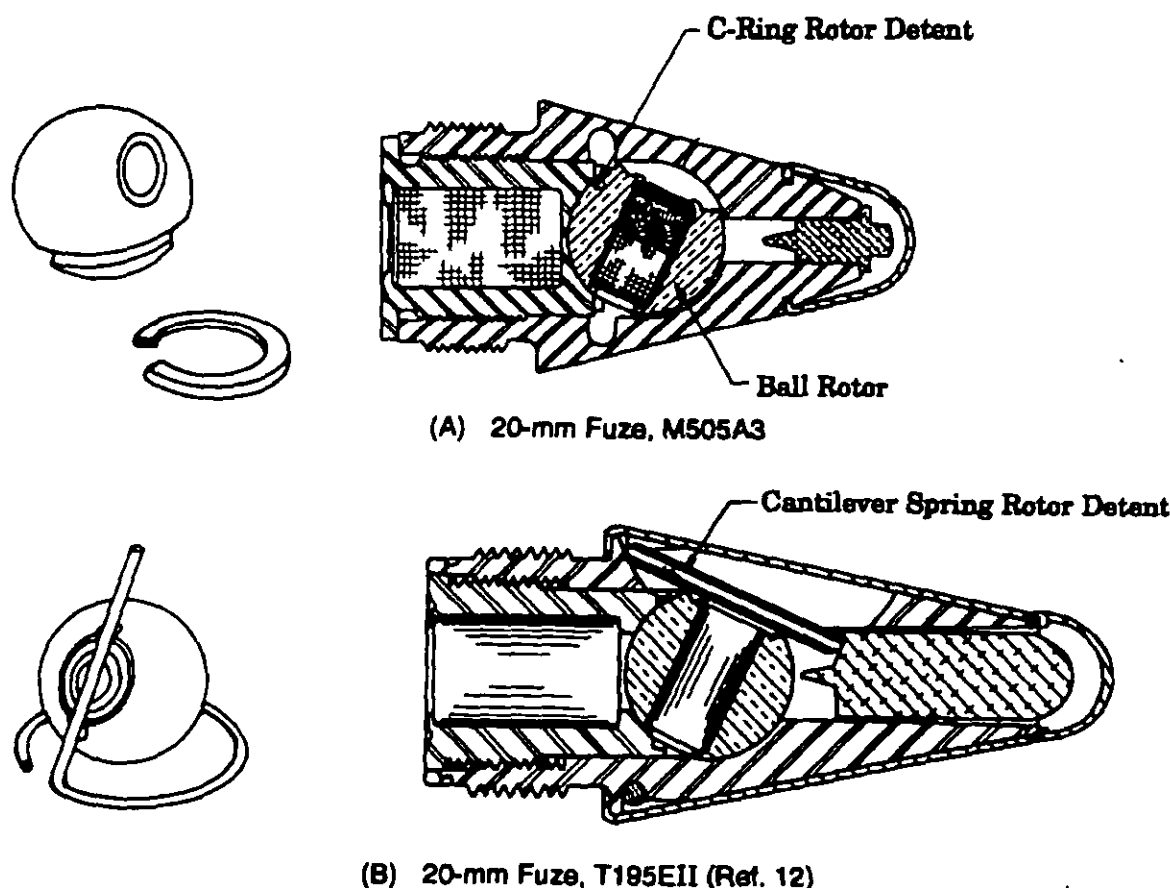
C-Ring and Cantilever Spring Methods of Holding Ball Rotor
